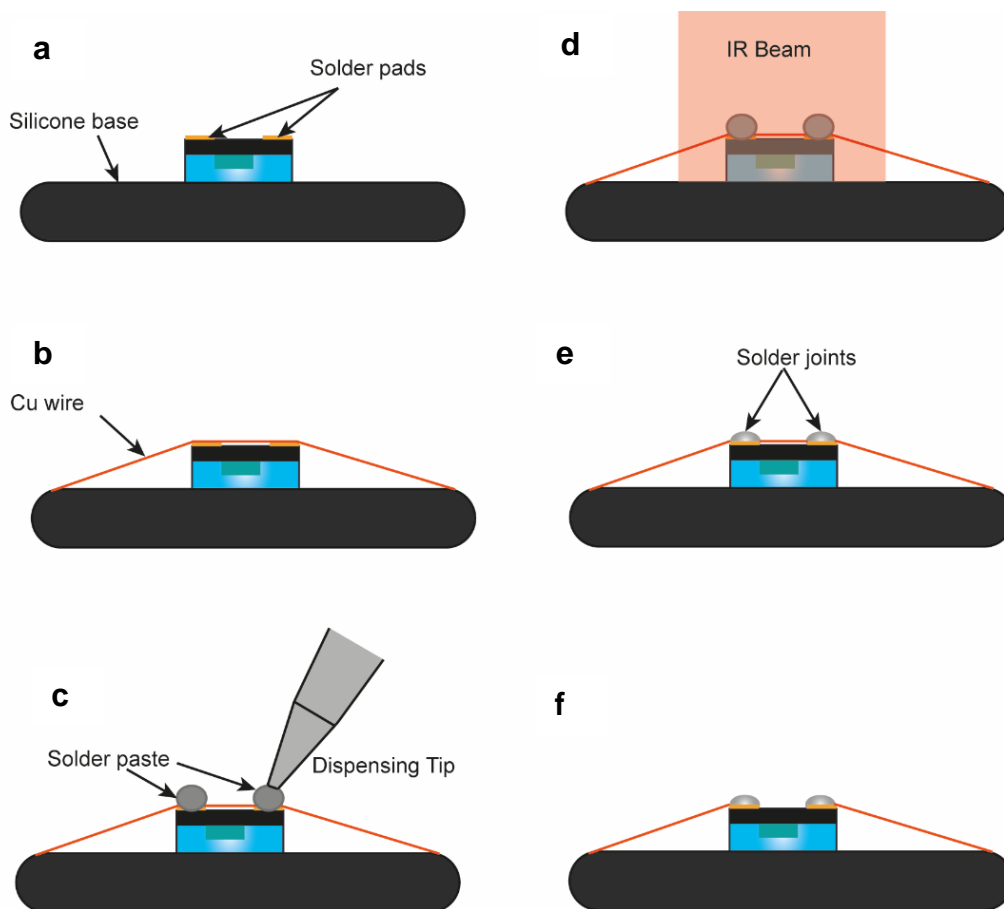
Soldering process for SMD photodiodes (PDs). (a) PD placed on the silicone base with solder pads facing upwards. (b) Cu wire placed over the solder pads of the PD. (c) Solder paste dispensed onto the solder pads and Cu wire at points of contact. (d) Solder pads and solder paste exposed to IR beam. (e) Solder joints formed. (f) Cu wire length between solder joints removed.
